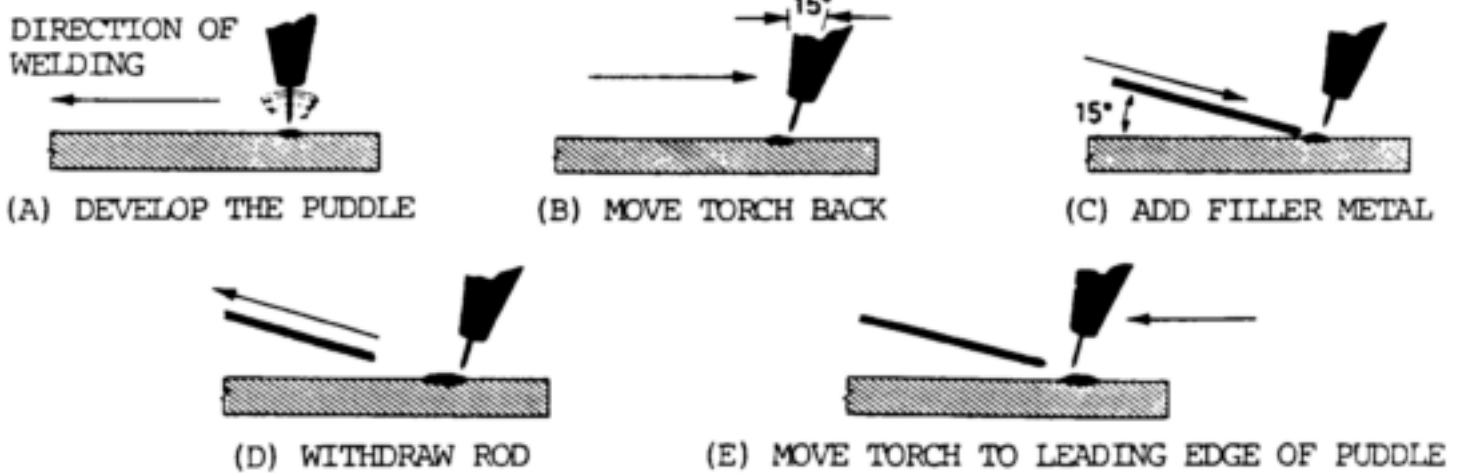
Technique for manual gas tungsten arc (TIG) welding.
